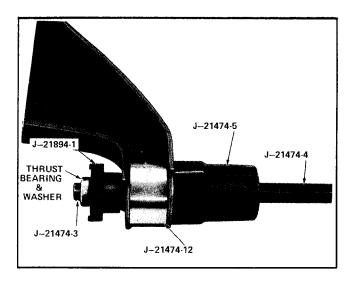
Removing Lower Control Arm Rear Bushing
